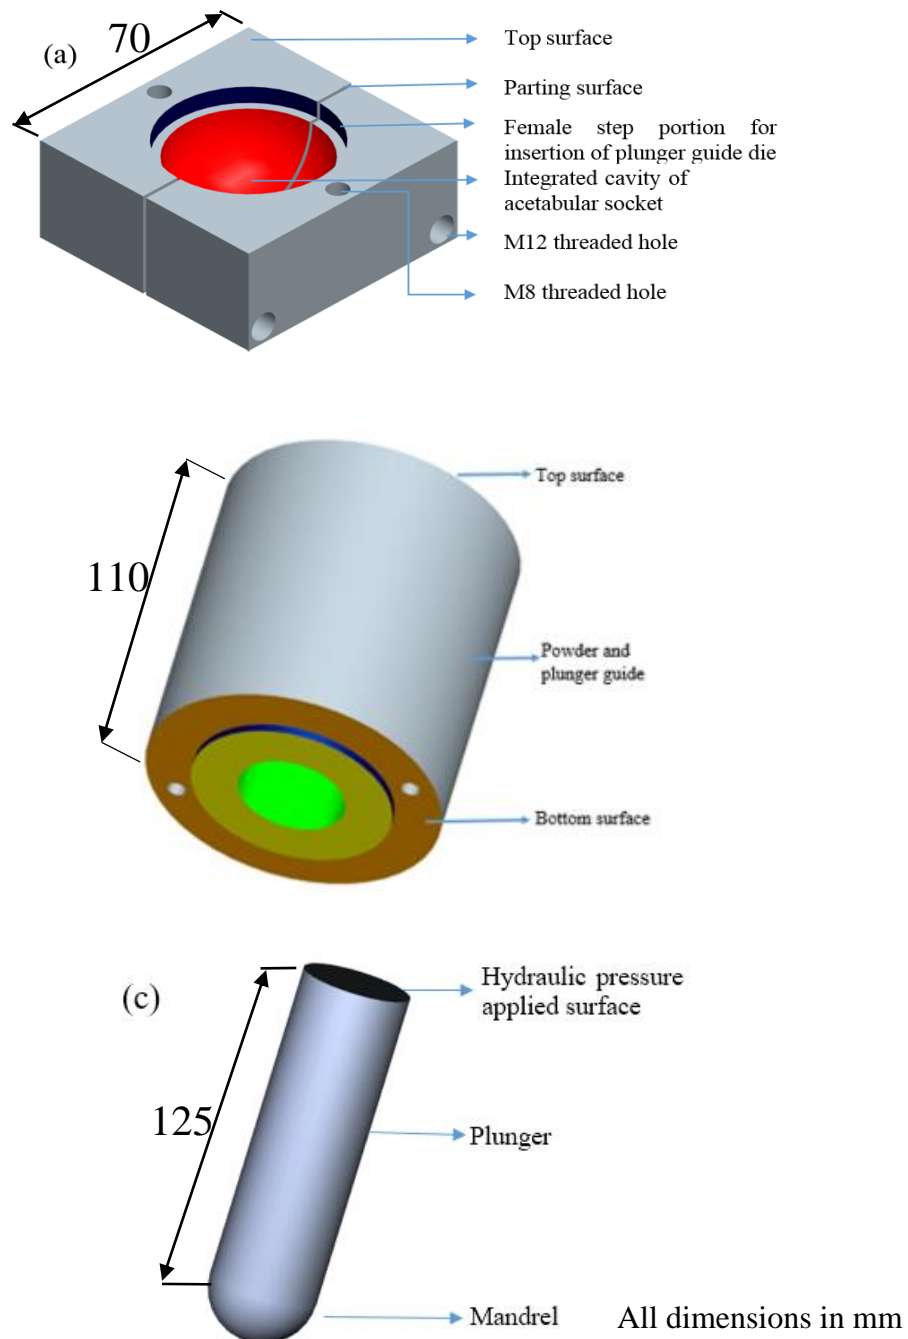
Typical multi-piece integrated steel die fabricated with consideration of polymer prototype component dimension, where design and drawing of cavity including plunger are shown for acetabular socket. Multi-piece integrated cavity mould for acetabular socket (a) bottom die (b) powder cum plunger guide die and (c) plunger.
